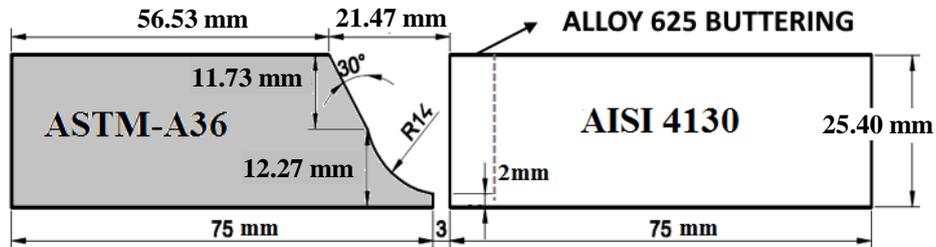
Joint to closed welding of the ASTM-A36 steel and AISI4130 bettered steel
